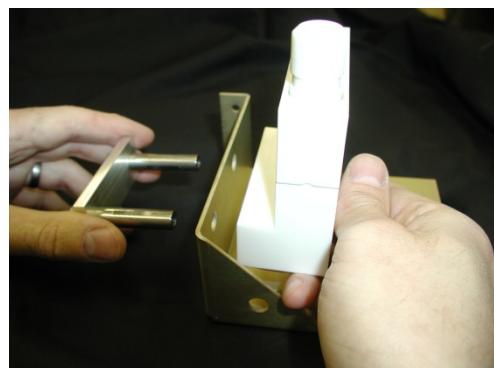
Metal plate with two M6 screws and spring washers attached
